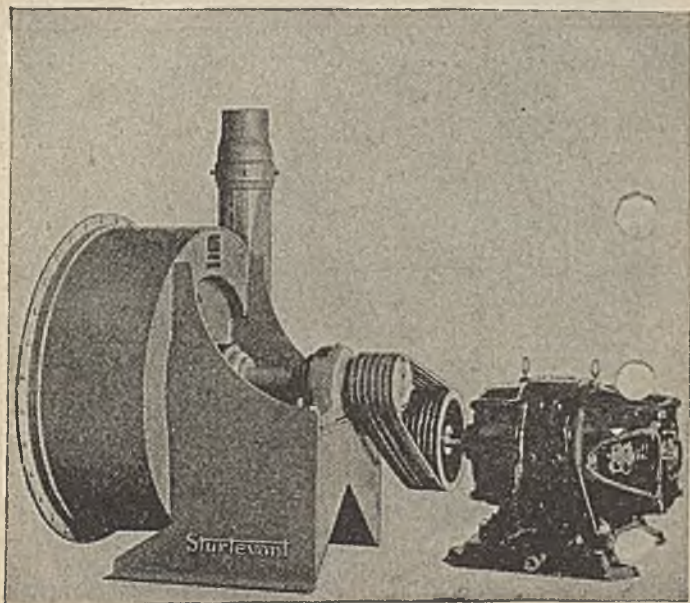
Assembly of motor driven single stage blower shown dis-assembled in figs. 1 to 3.
